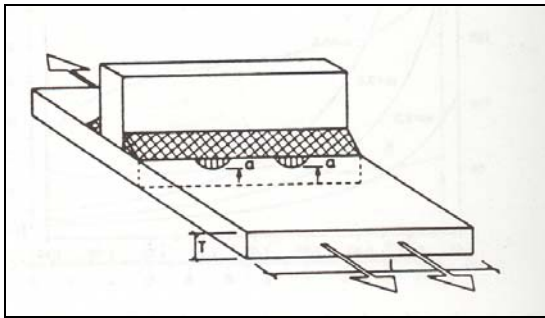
Illustration of Cracks at Weld Toe
